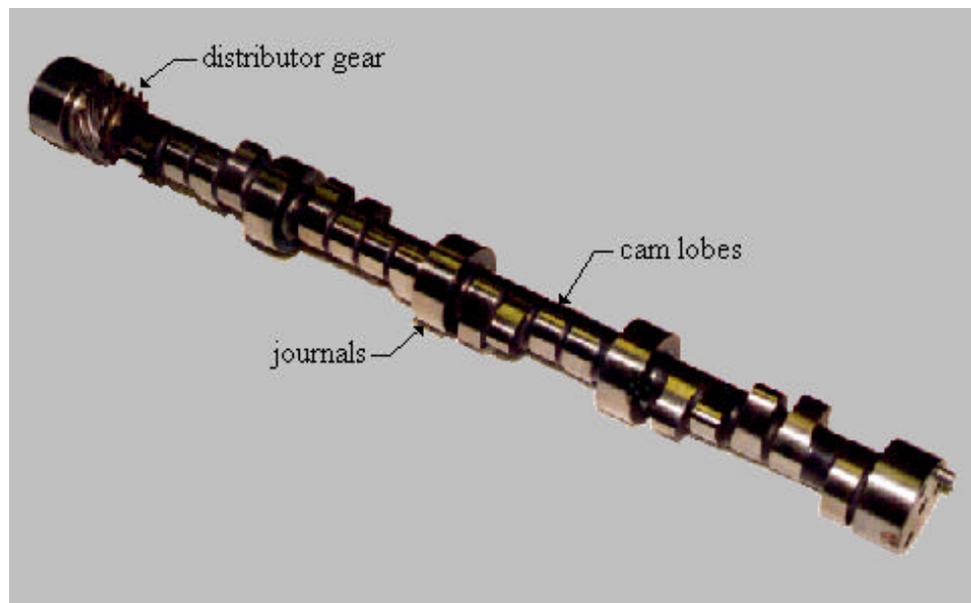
Typical multi-lobe internal combustion engine camshaft
